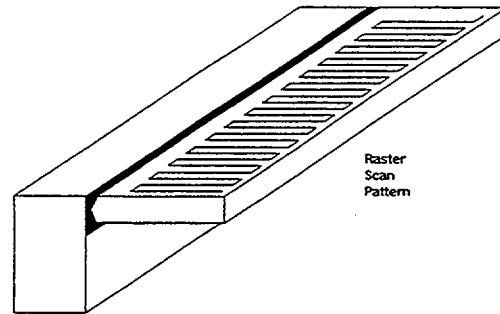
Scan pattern used in conventional inspections of core shroud welds.
